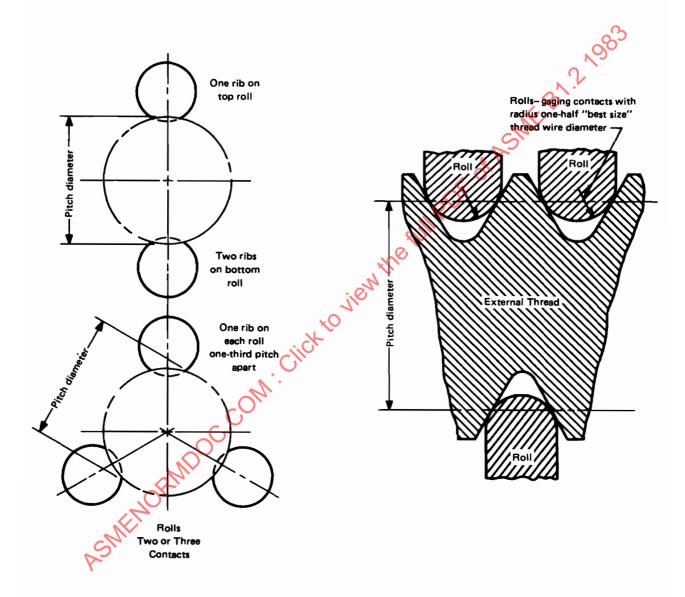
INDICATING THREAD GAGES—MINIMUM-MATERIAL THREAD GROOVE DIAMETER LIMIT AND SIZE
